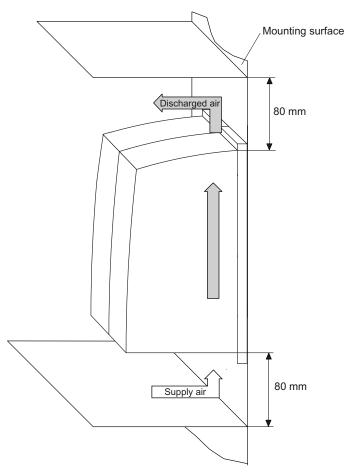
Cooling clearances for Motor Modules Booksize Compact
